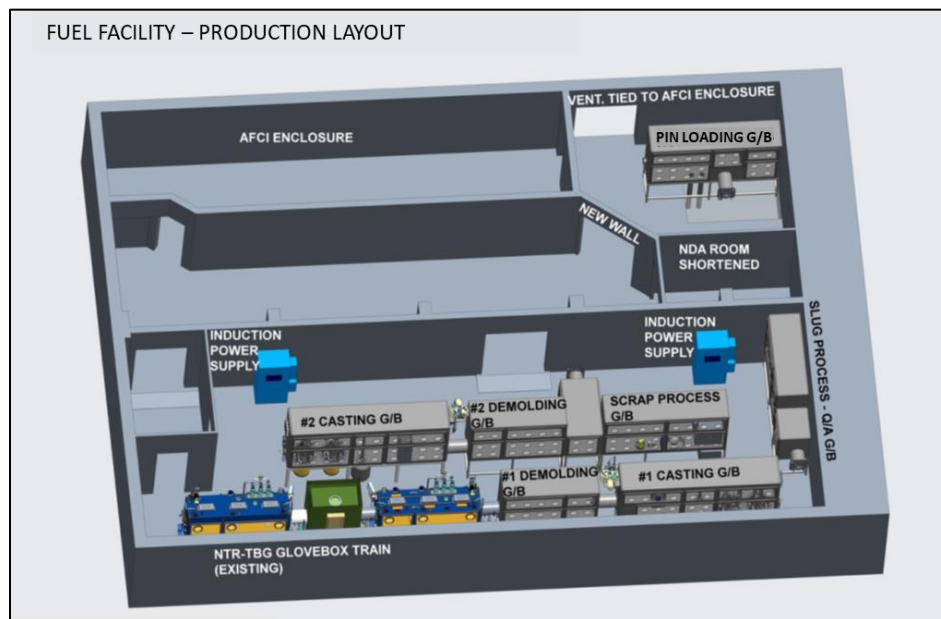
Fuel Manufacturing Facility Fuel Pin Fabrication Equipment Arrangement
